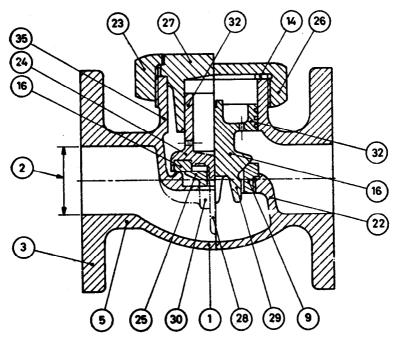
Horizontal Pattern Lift Type Piston Check Valve
